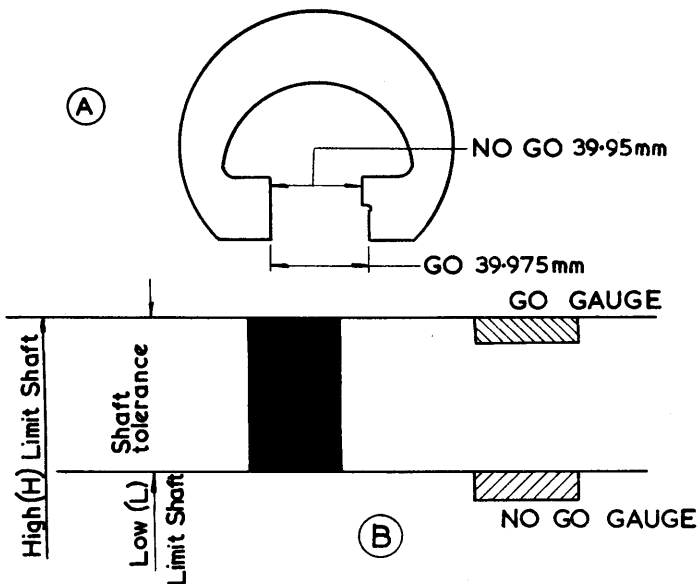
Progressive Gap Gauge with Gauge Tolerance.
